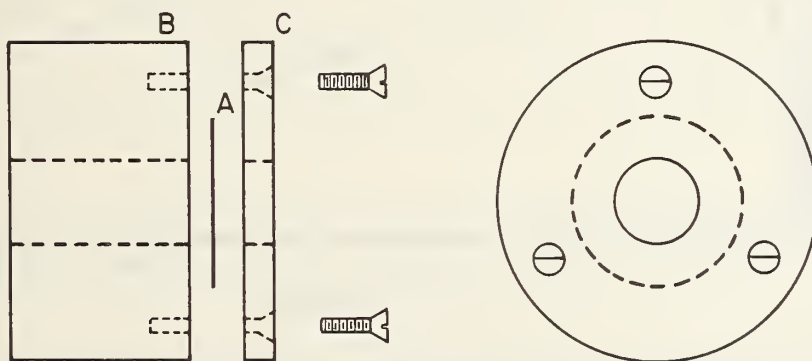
Sketch of disk mounting fixture. The side view at the left shows the fixture disassembled with the disk (A) in position ready to be clamped to the body (B) by clamping plate (C). As explained in the text, the diameter of the bore determines the aperture, that is, the area of disk exposed to thermal radiant energy. The outer diameter of the fixture is set by the requirements of the transducer mounting block.
